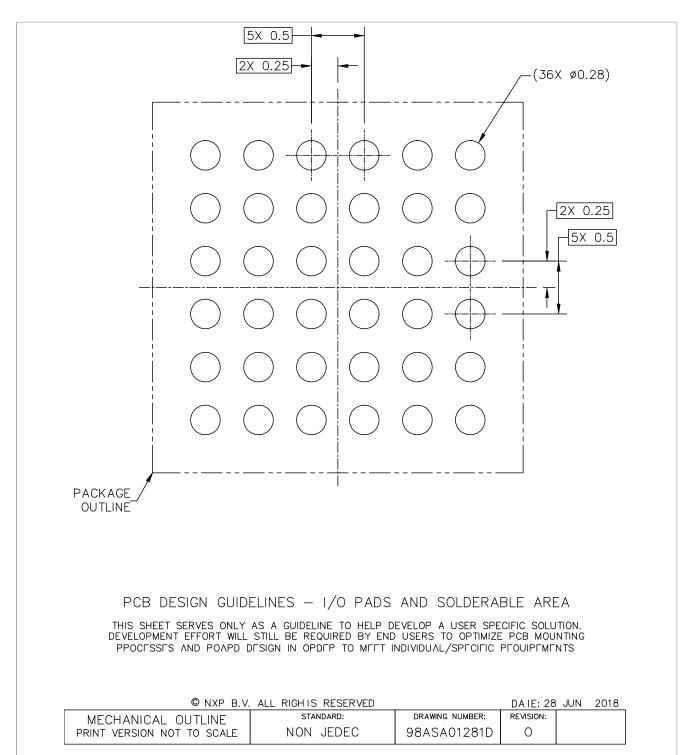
VFBGA36 PCB design: I/O pads and solderable area
